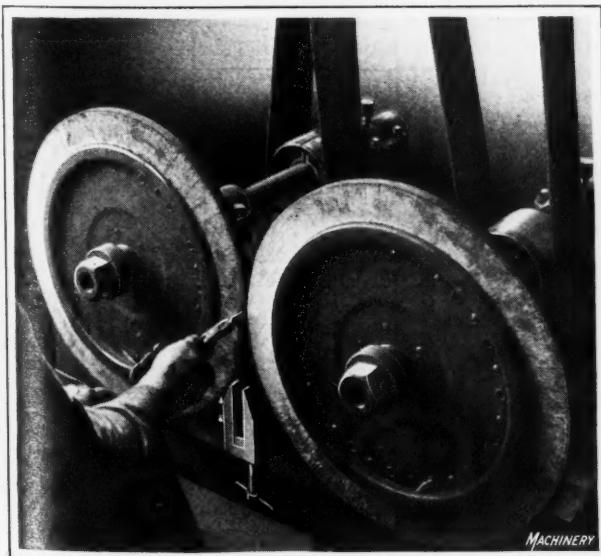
Double-header Polishing Machine used for finishing Pocket Knife Blades
